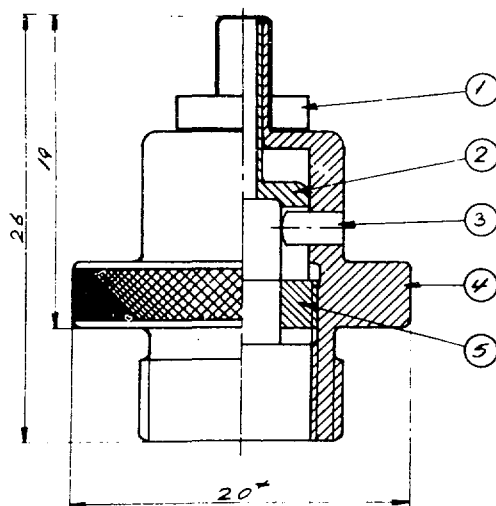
Plunger target holder with 2.3 mm outer tube diam.
